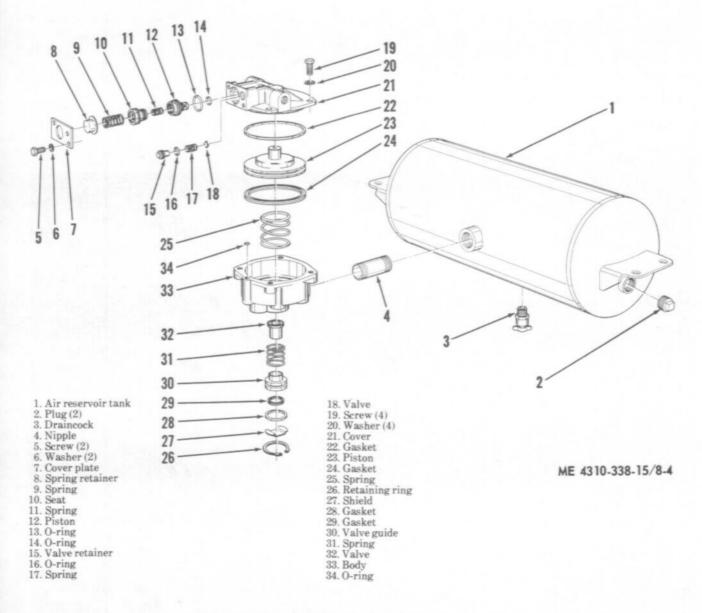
Emergency relay valve; disassembly and reassembly.
